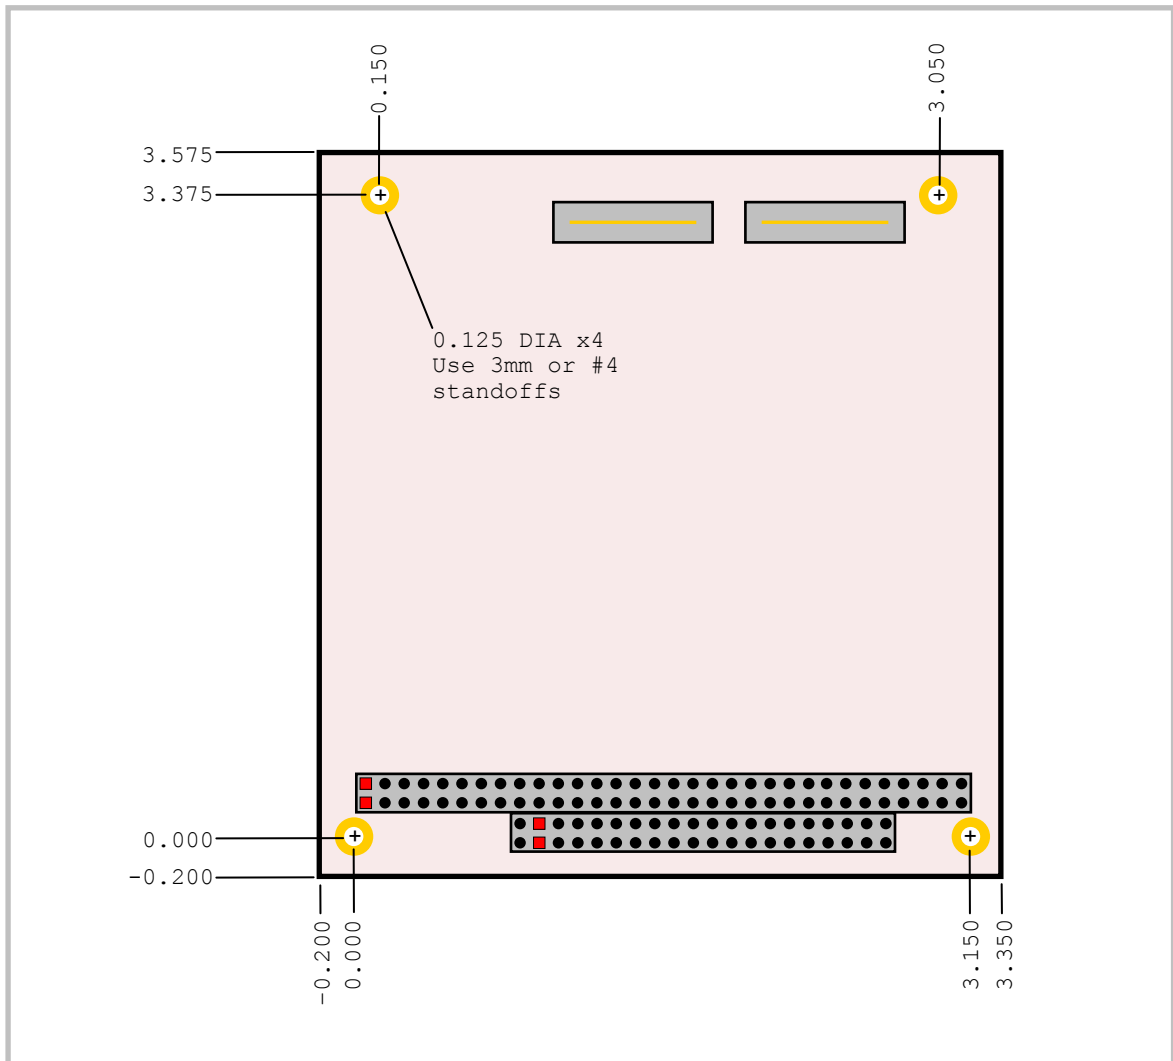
VL-EPMs-U1 Dimensions and Mounting Holes
